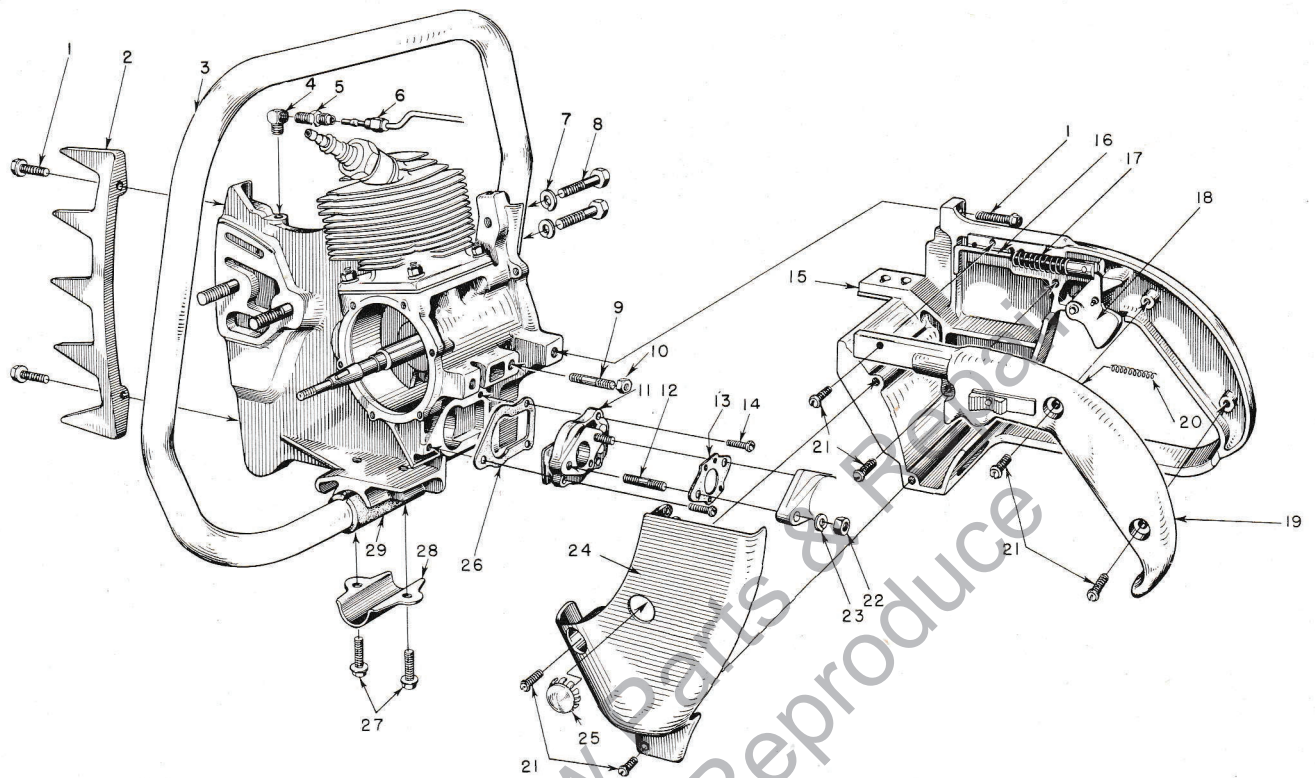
HANDLE, GRIP AND REED VALVE PARTS
